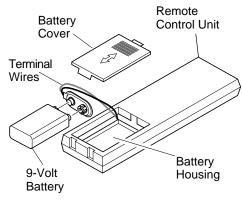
Installing Battery in Hand-Held Remote Control Unit
